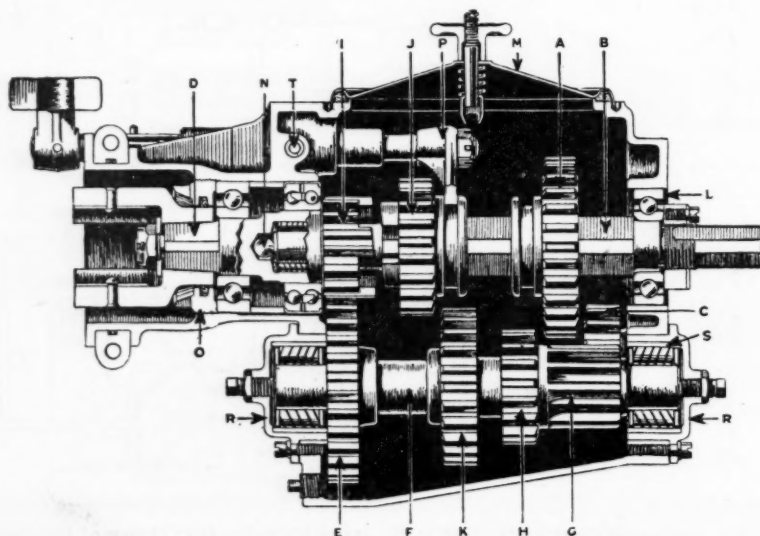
Mitchell transmission showing locations of gears, forks, etc.
